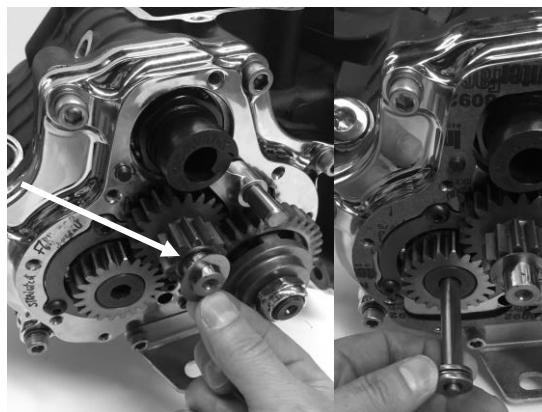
| THRUST WASHER, RELEASE AND ACTUATOR ROD INSTALLATION
